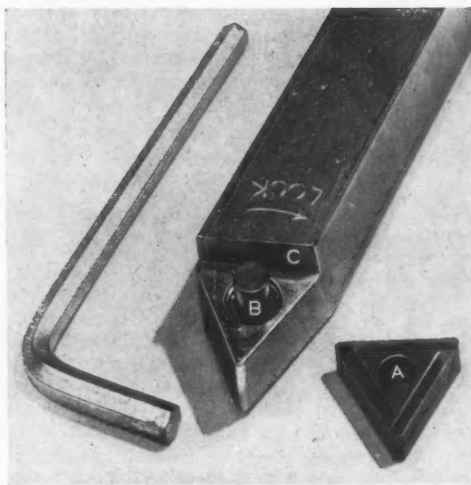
The Tip is Securely Held in the Holder by the Locking Action of an Eccentric-ended Socket Head Screw
